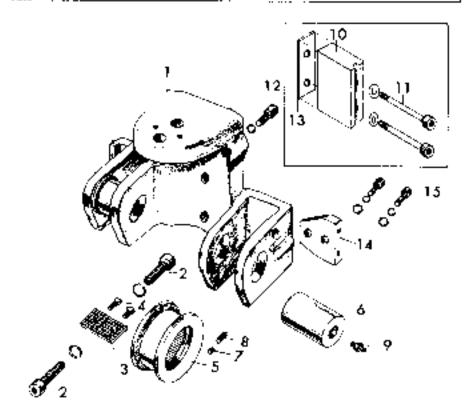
CROSS HEAD FOR HPRIGHT
